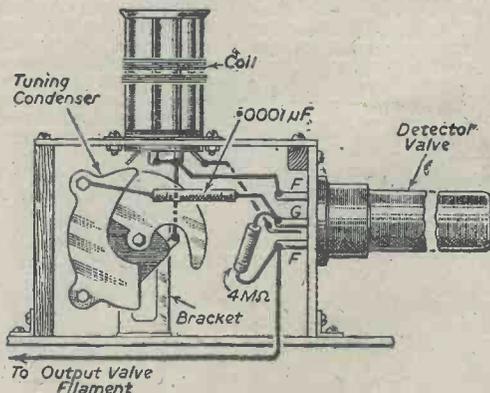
Shows arrangement of pieces for carrying coil and valve holders in box form.
